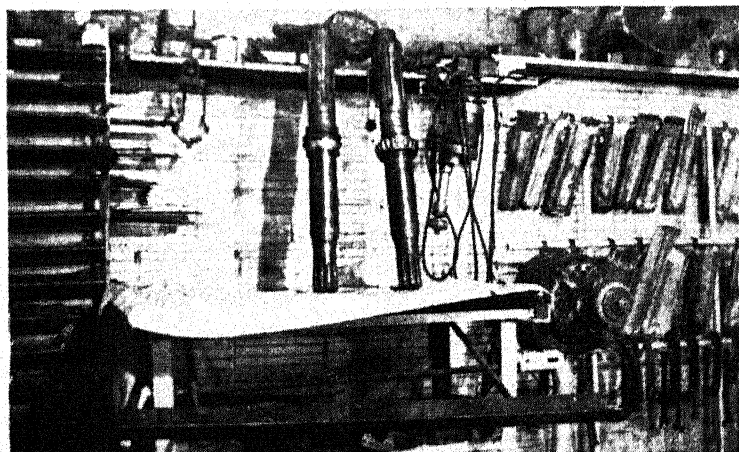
Tractor axle shaft splines built up by arc welding.
